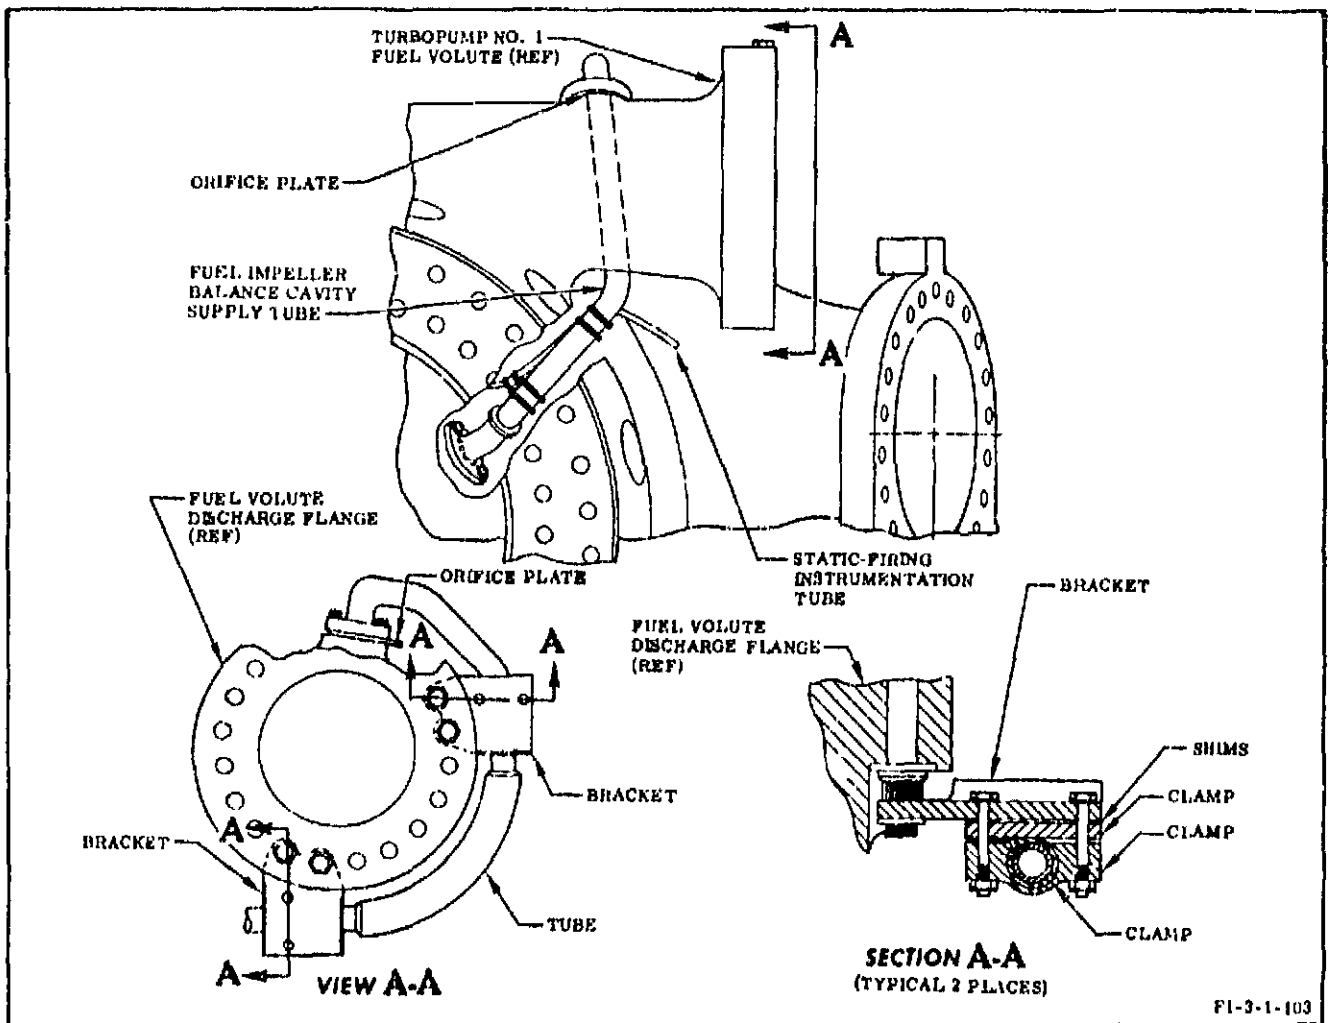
Fuel Impeller Balance Cavity Supply Tube
